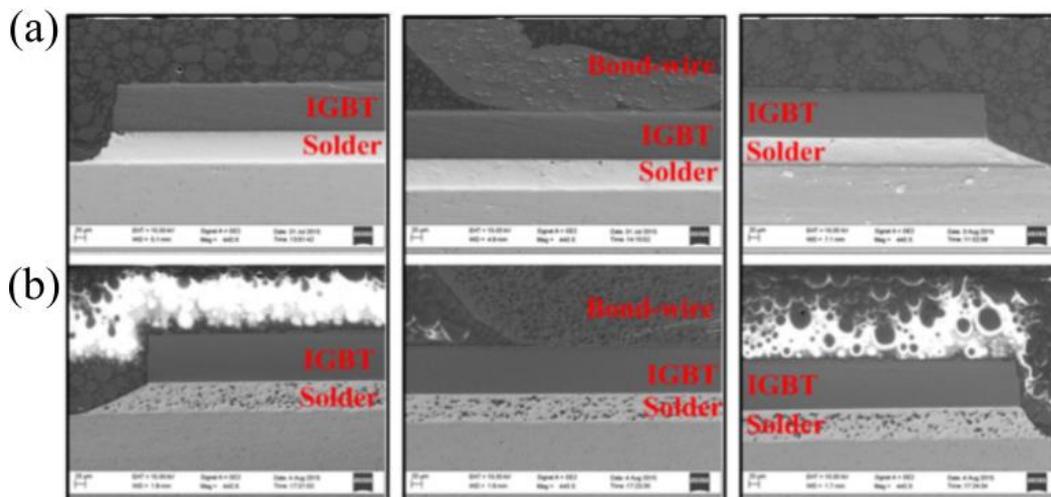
Solder joint. a) New device, b) Aged device [170].
